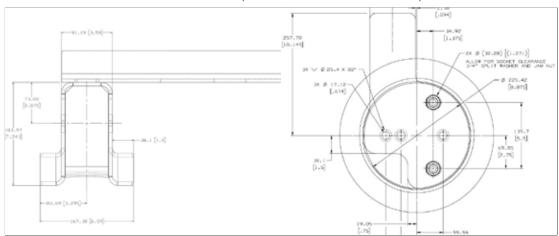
WELD-ON TRAILER MOUNTING DETAIL (SEE SECTION 14 FOR LARGER IMAGES)
